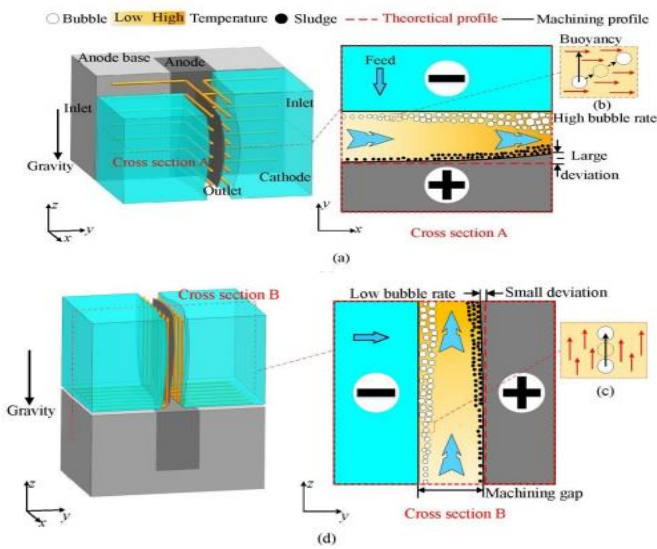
Illustration of a blade electrochemical machining using the axial flow approach [16]
